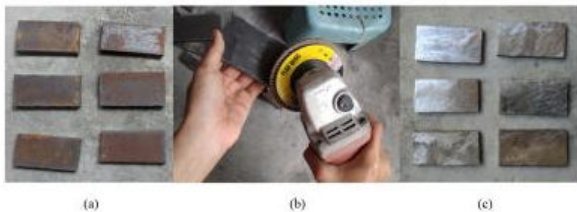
(a) ASTM A36 steel specimen before cleaning (b) the process of cleaning the specimen using sandpaper (c) Cleaned ASTM A36 steel specimens
